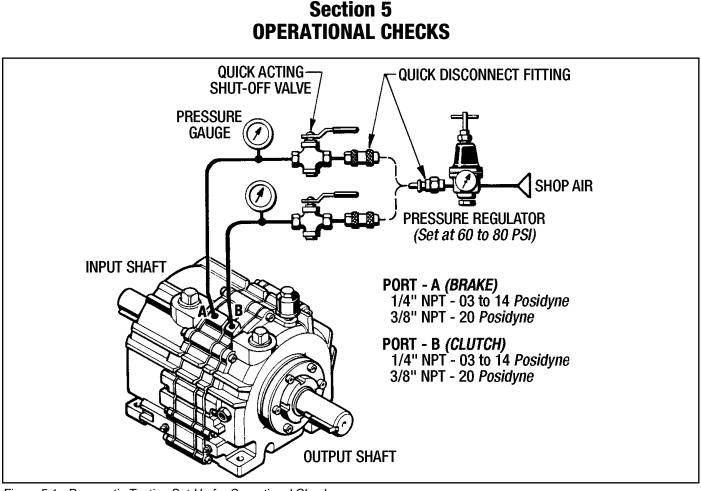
Pneumatic Testing Set-Up for Operational Checks
